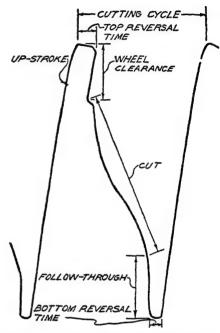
An enlarged view of disc cutting cycle showing its principal parts
